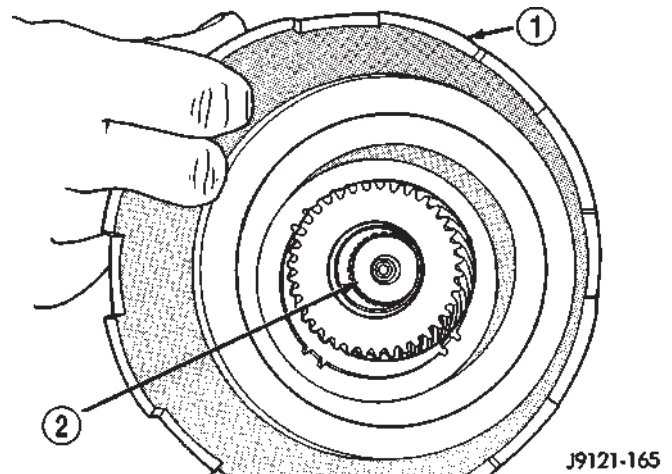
Installing Assembled Sun Gear And Driving Shell On Output Shaft
